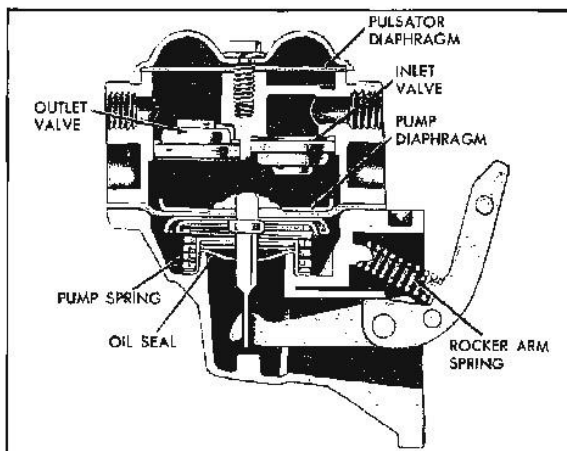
B-109 Schematic View of Fuel Pump 6 Cylinder
